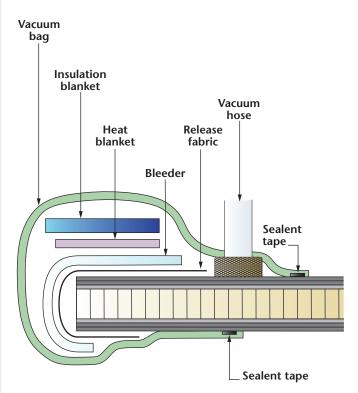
Stack-up of heat being applied to the edge of a piece of honeycomb panel.
